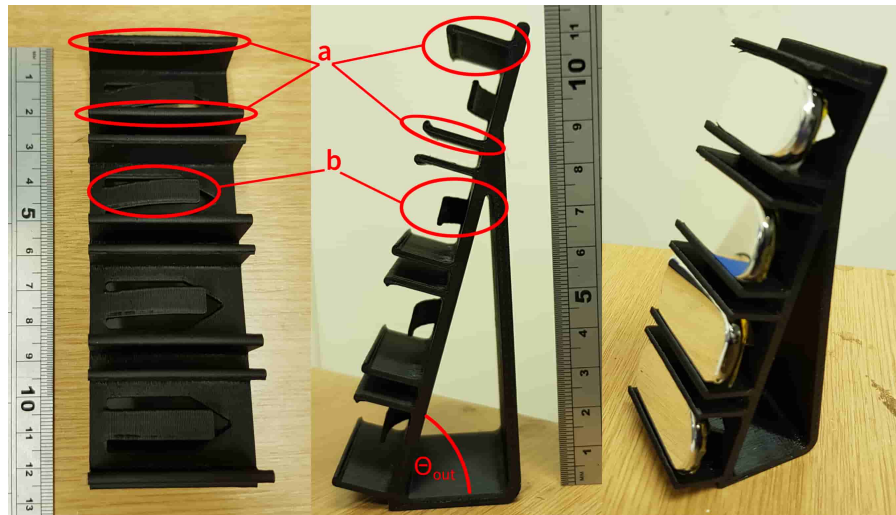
Front view (left) and side view (middle) of a 3D printed basaltic glass mirror mount. Each mount can hold 4 mirrors (right) in place, each pushed into the reflective plane by the back spring (b), and clamped in position by the side springs (a). The scale bars are in cm with mm separation dashes and Θ_{out} shows the angle in-between test bench and reflective surface.
